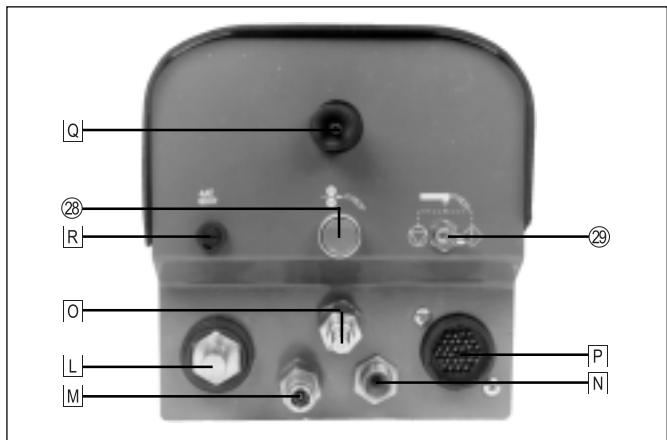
Rear view of T.I.M.E. 30 wirefeeder
